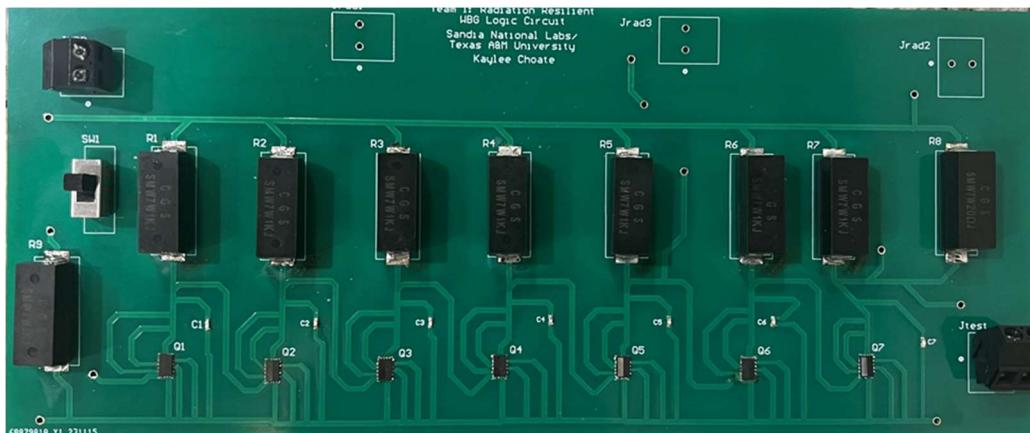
Seven-Stage Ring Oscillator Physical PCB
